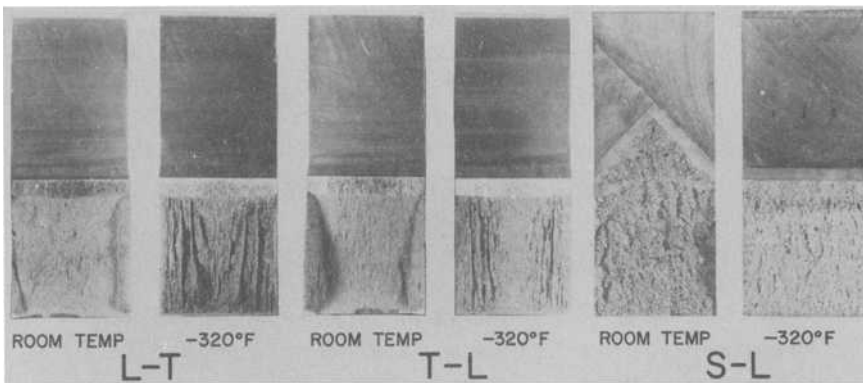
Fracture surfaces of compact fracture toughness specimens from 7005-T6351 aluminum plate, 3-in. thick.
